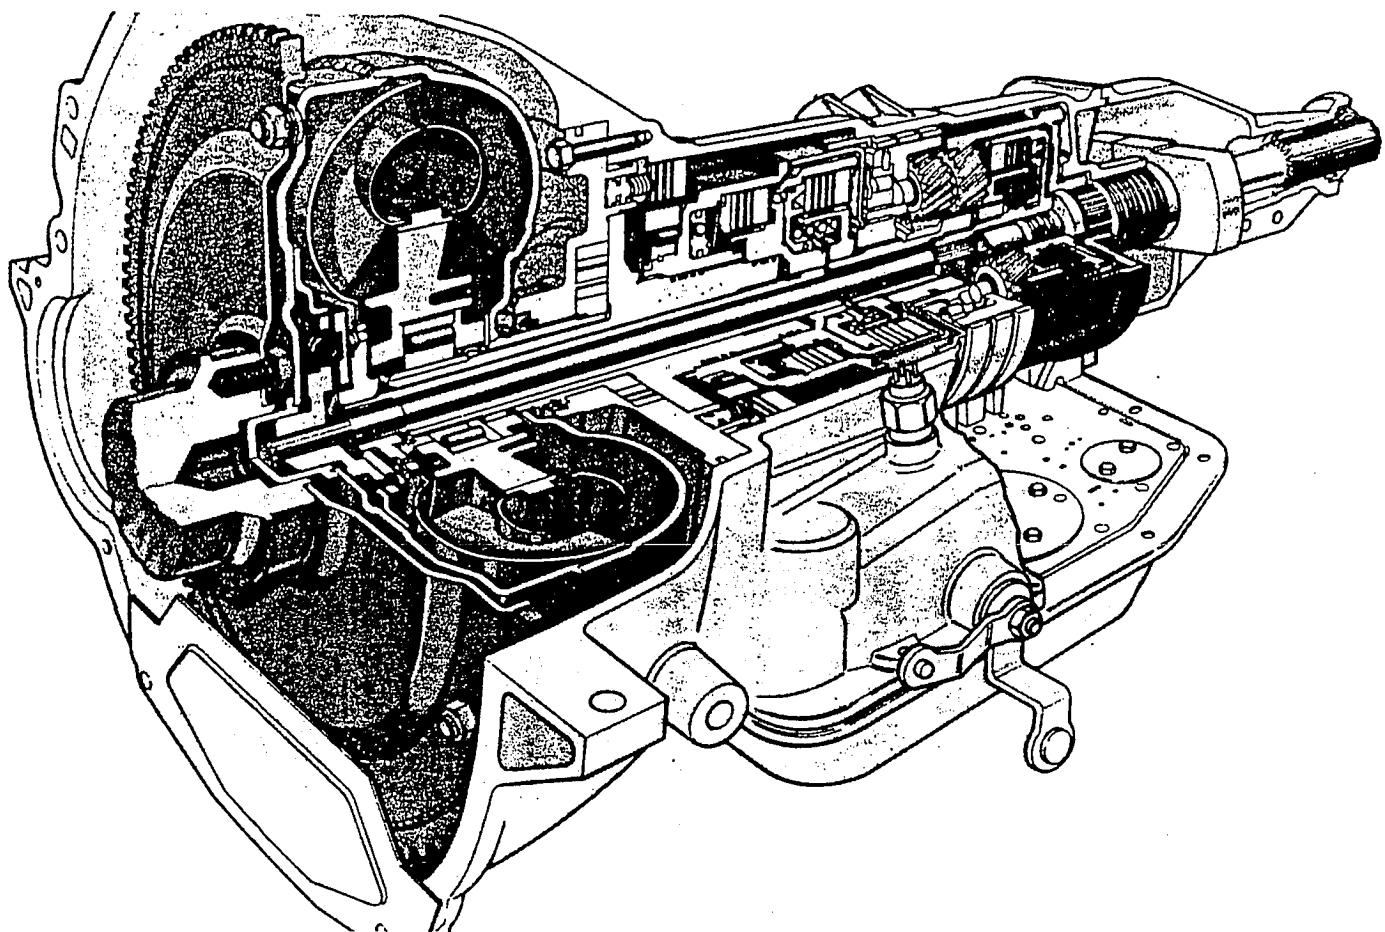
Four-speed automatic transmission with overdrive in fourth gear. Unit is equipped with a lockup converter that is actuated in fourth gear. How many parts can you name? (Lincoln-Mercury)
